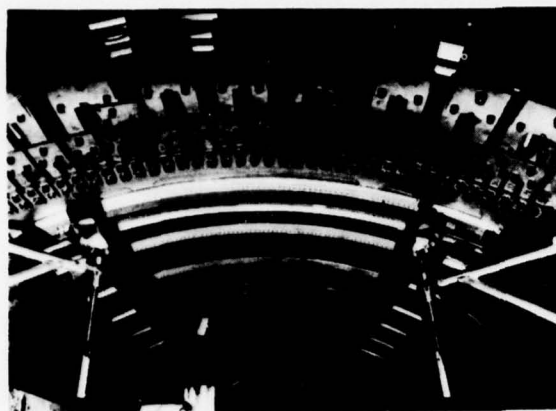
TEST PANEL INSTALLED IN PRESSURE JIG
